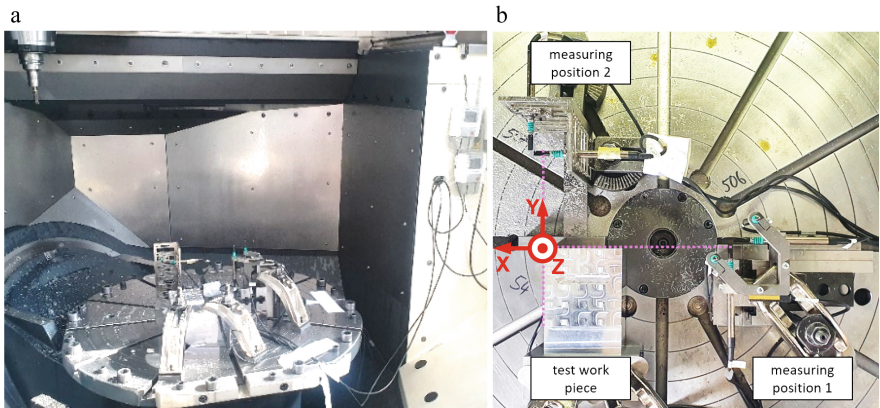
Test setup on DMU80 machine tool: a) front view, b) top view.
